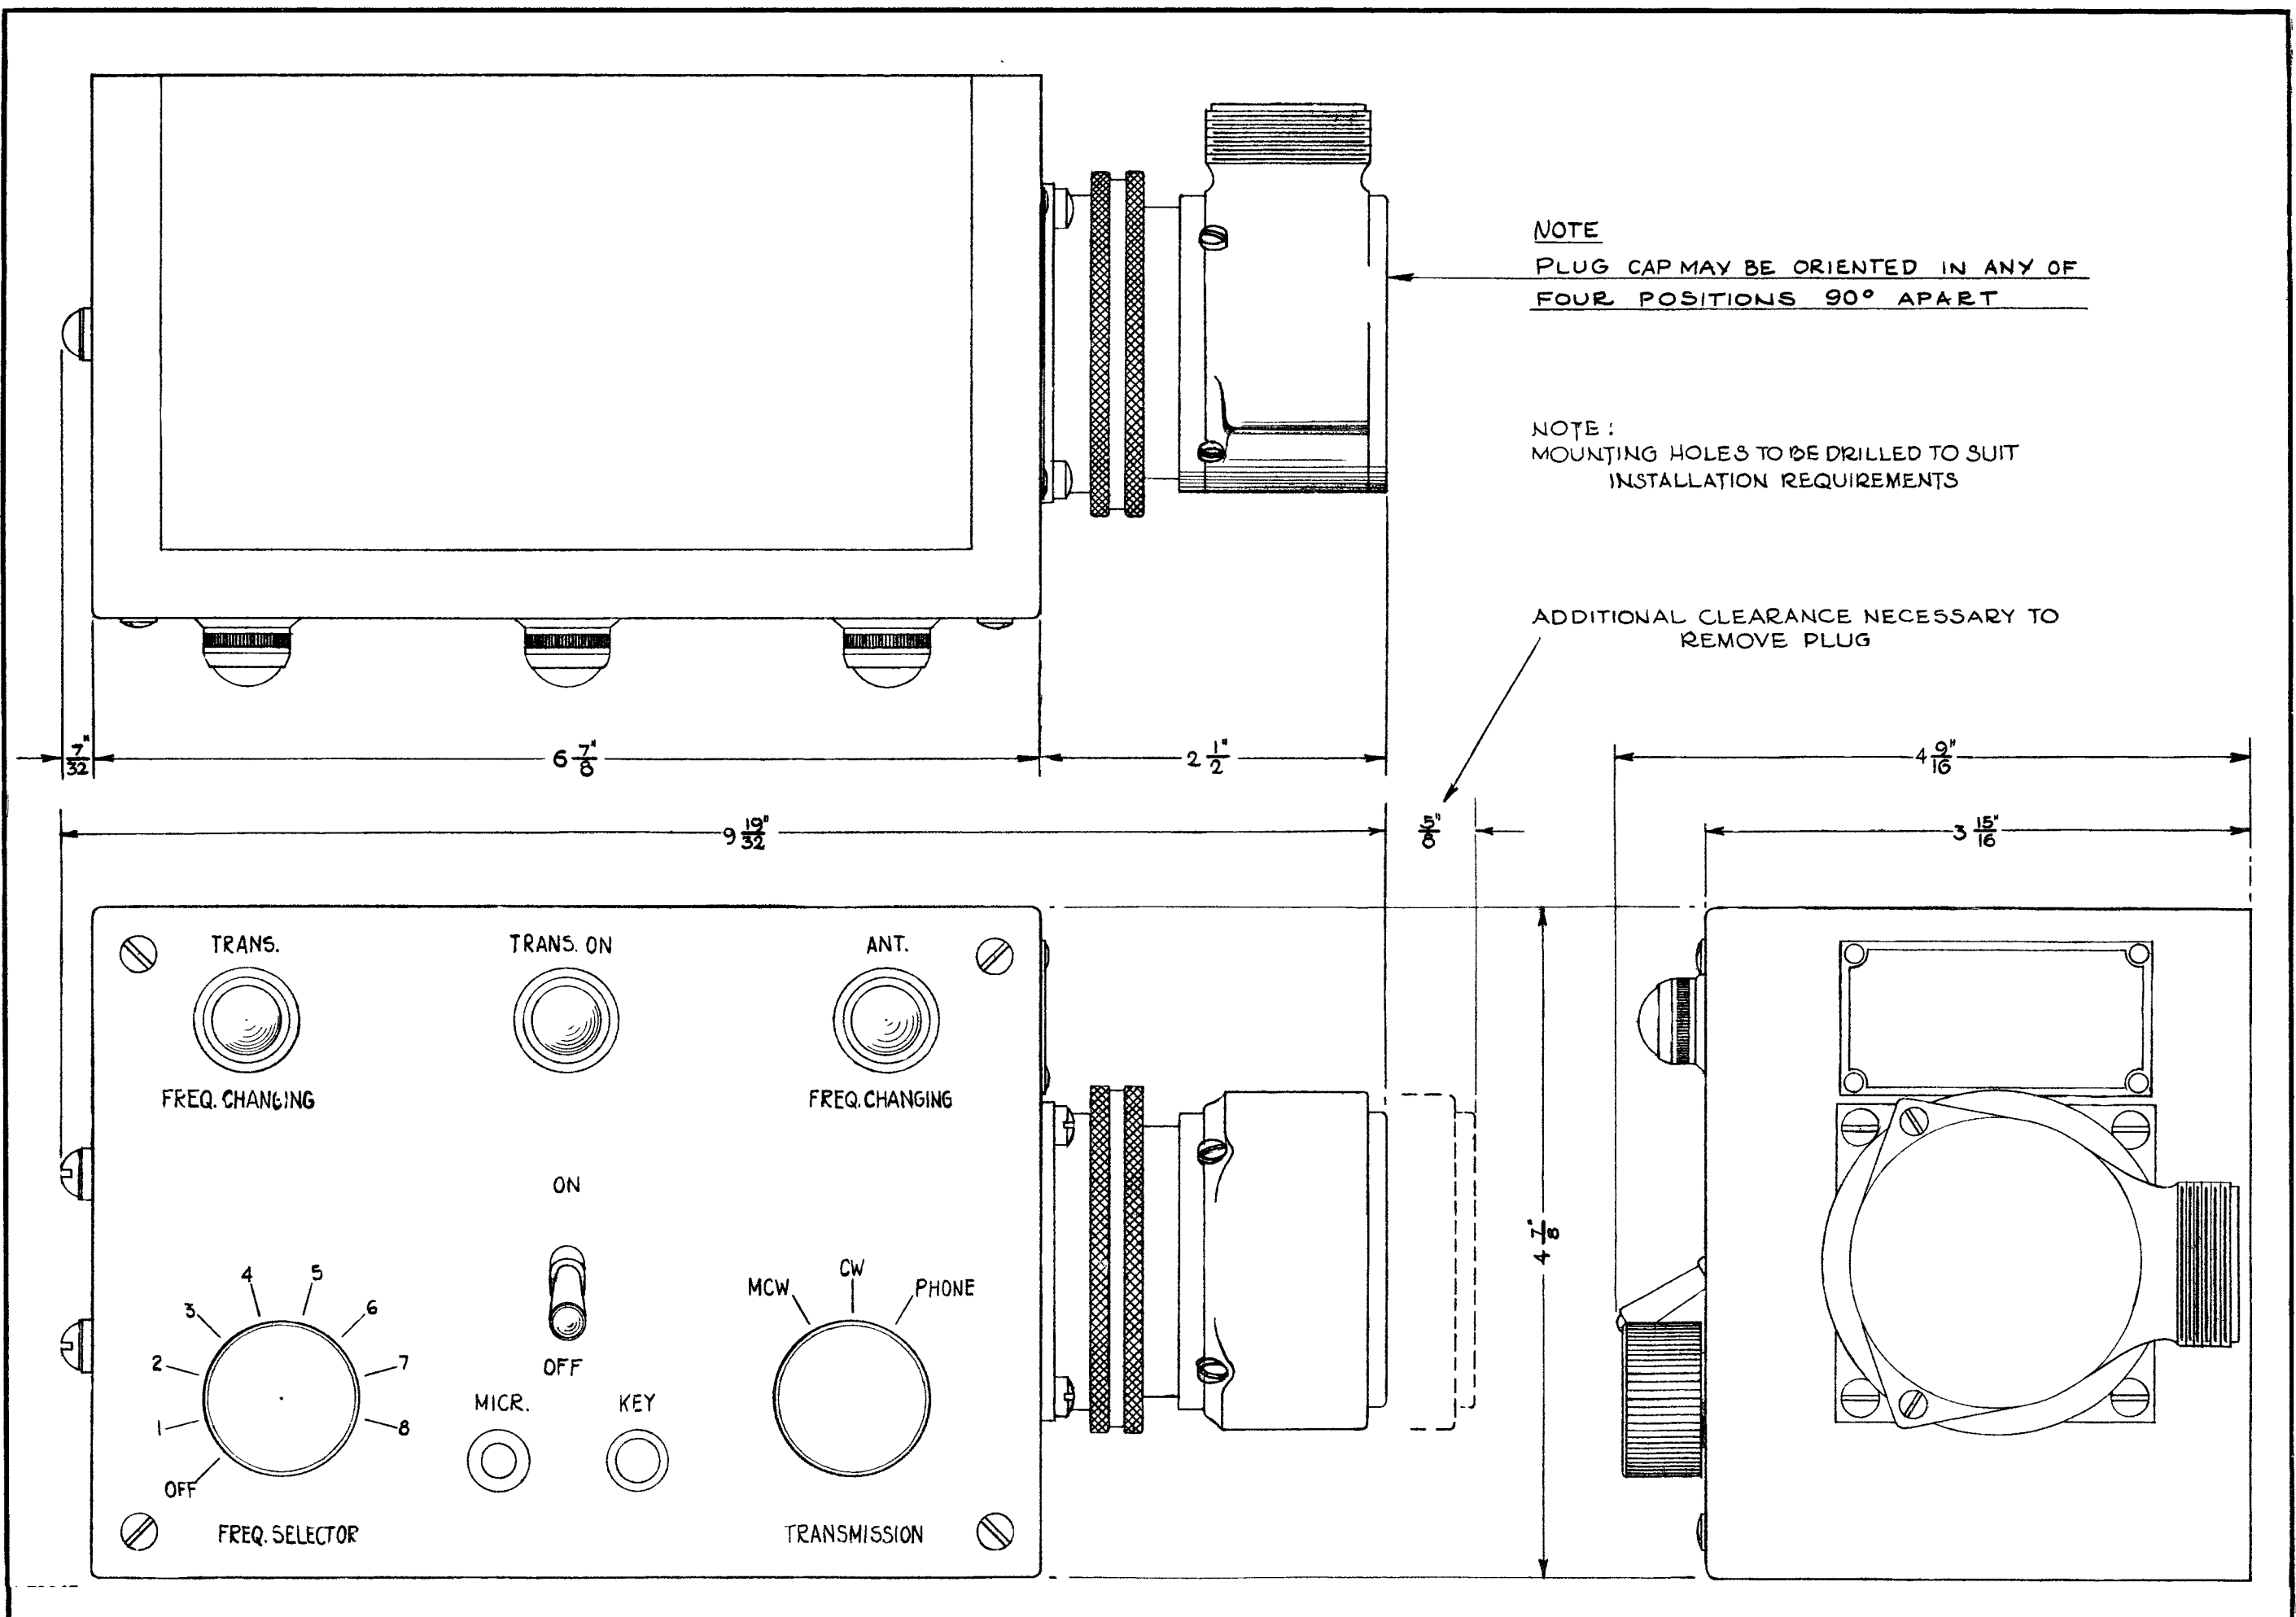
OUTLINE AND MOUNTING DETAILS REMOTE CONTROL UNIT
